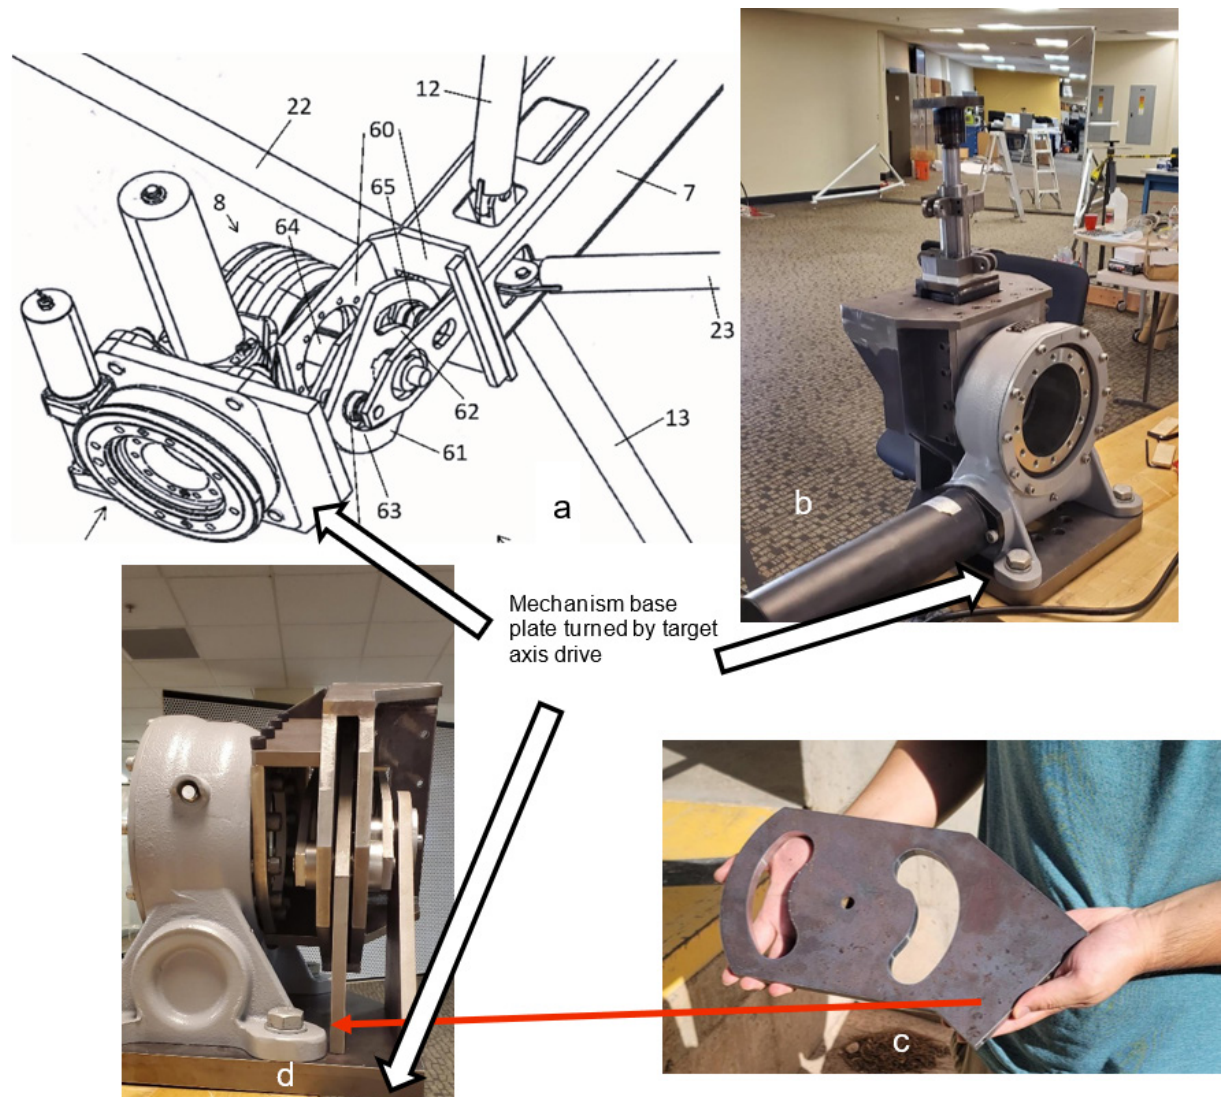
(a) Cutaway schematic of the dual axis slew bearings and cam mechanism (b) cross-axis drive with mechanism set for 0° AOI and the two clevises driven in the vertical direction (c) cam plate before assembly (d) side view with the mechanism set for 70° AOI
